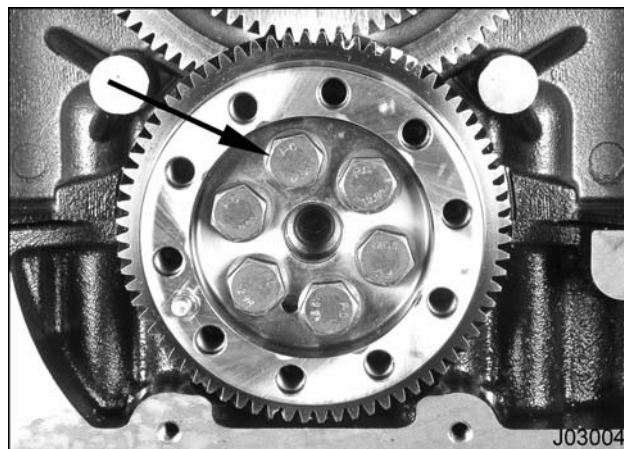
Rear primary crankshaft flange bolts (do not remove)
